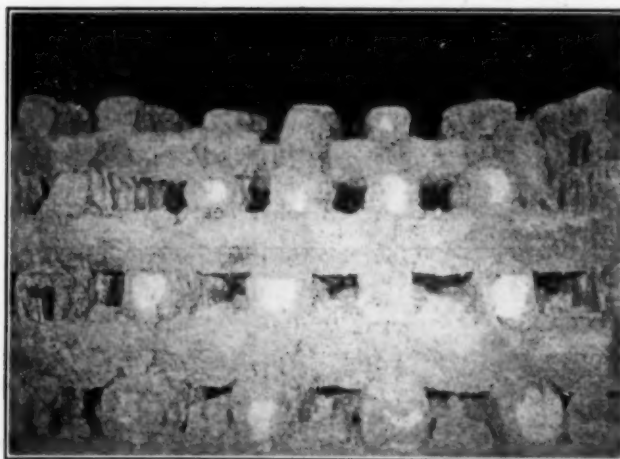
CHECKERS IN GAS CHAMBER OF OPEN-HEARTH FURNACE, SHOWING SLAGGING
